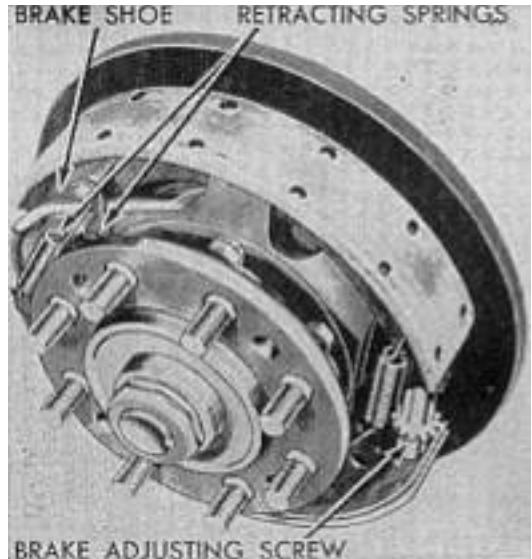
Model 8N brake and rear wheel hub. Hub is splined to wheel axle shaft.
